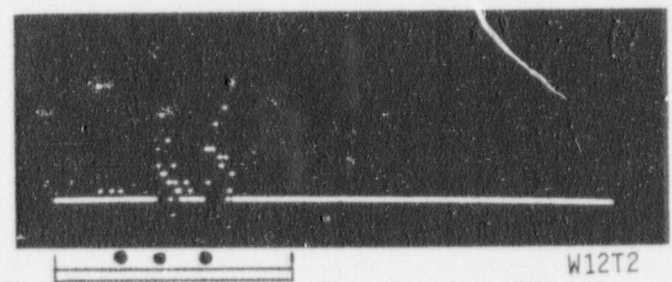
DETECTION OF 2.0" SLAG INCLUSIONS DURING SUBMERGED ARC WELDING OF A533B STEEL
